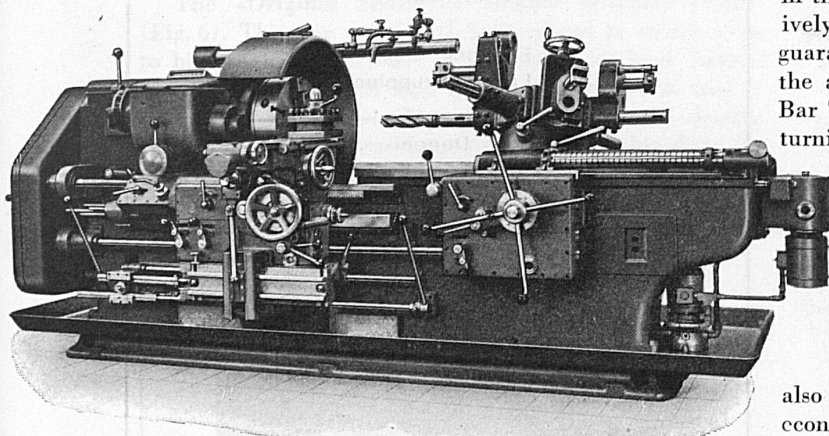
«Original Schaerer» Chuck Turret Lathe.
